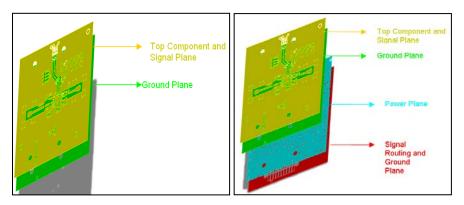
A two layer board stack-up. Figure 2: A four layer board stack-up
